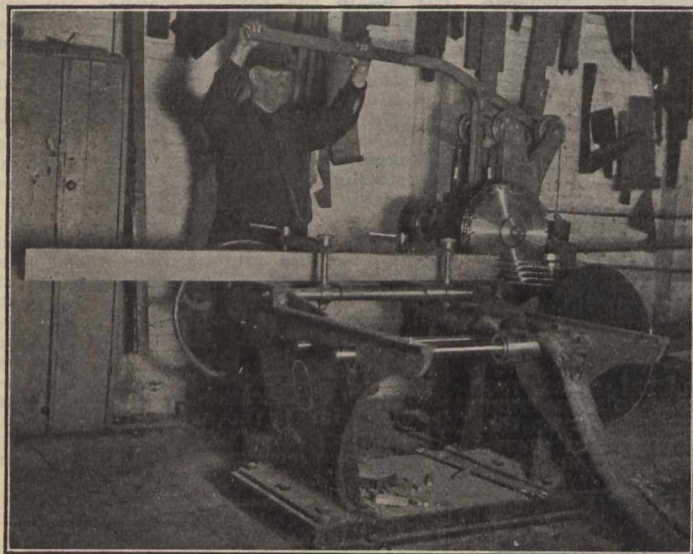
Tie Plug Forming Machine Ready for First Cut.
